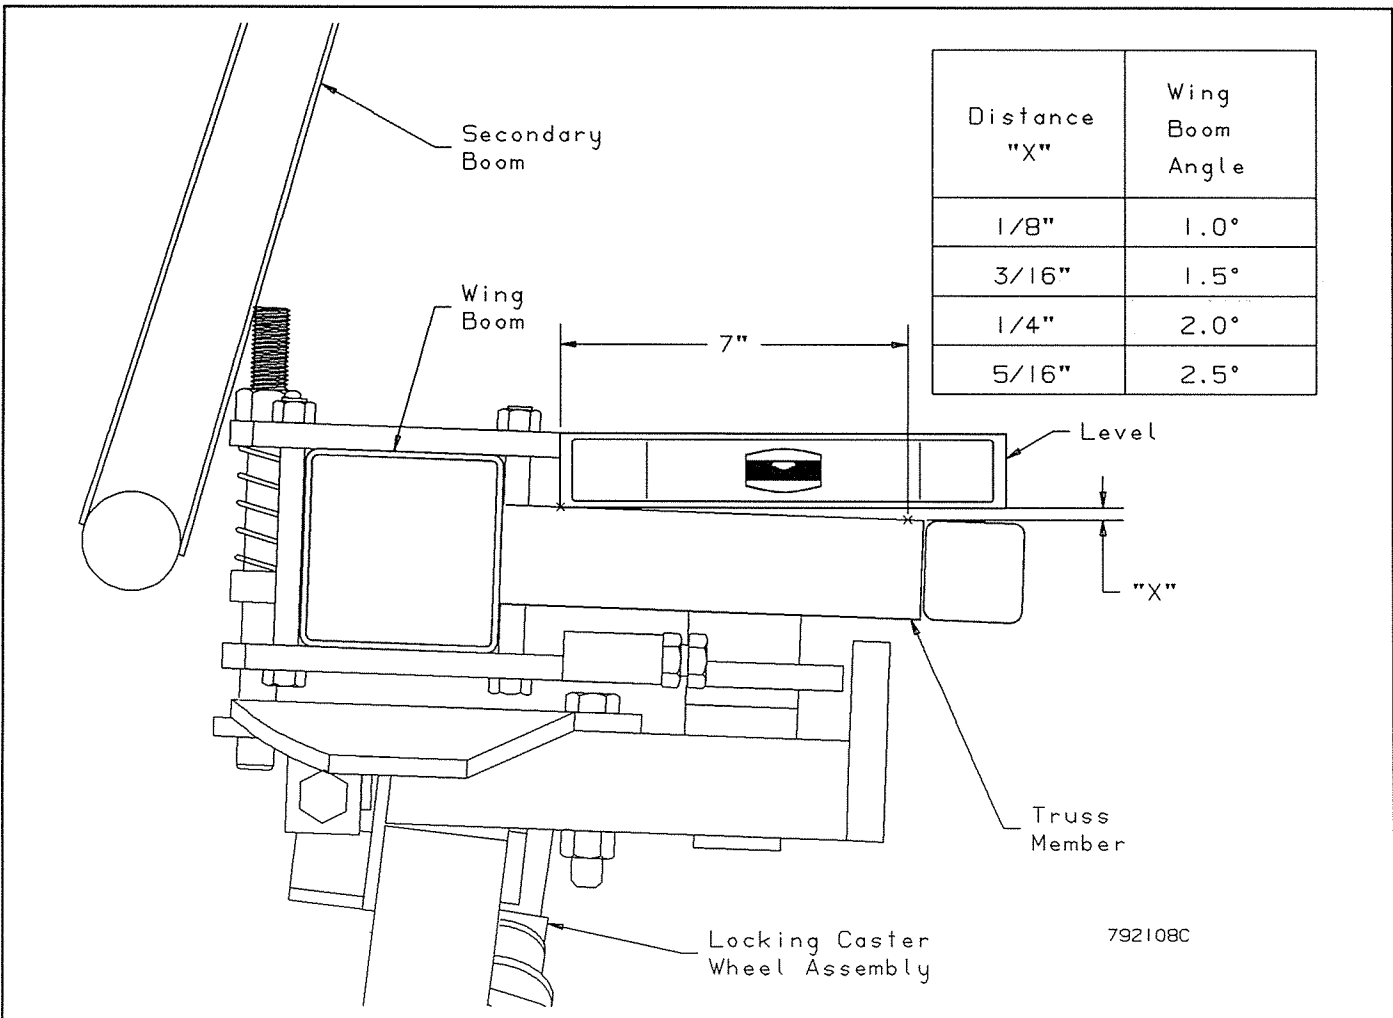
I: Checking Wing Boom Angle At Locking Castor
